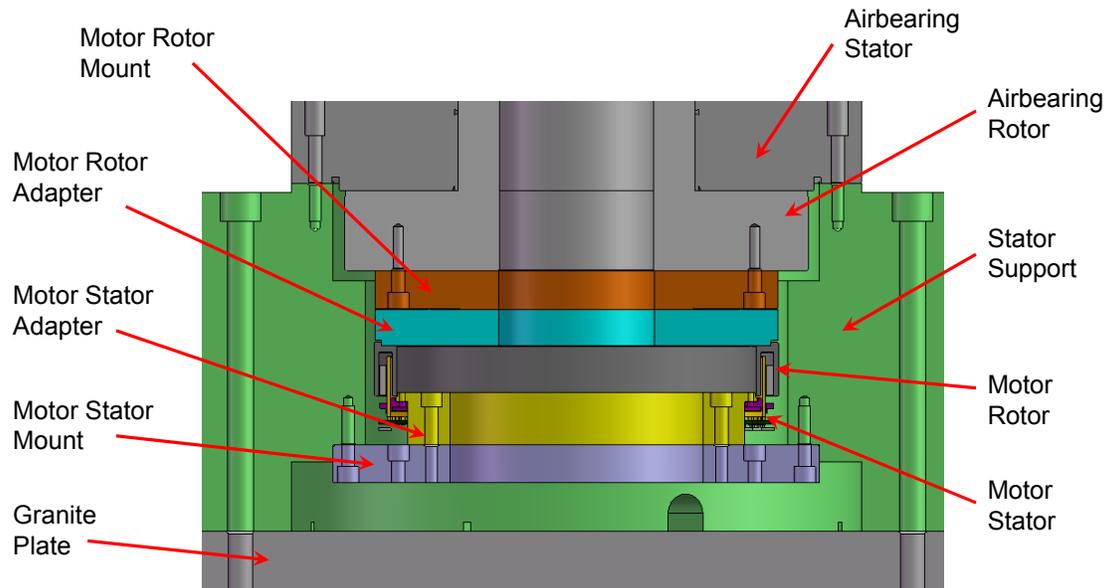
Section-view showing the mounting of the TG8263 motor
